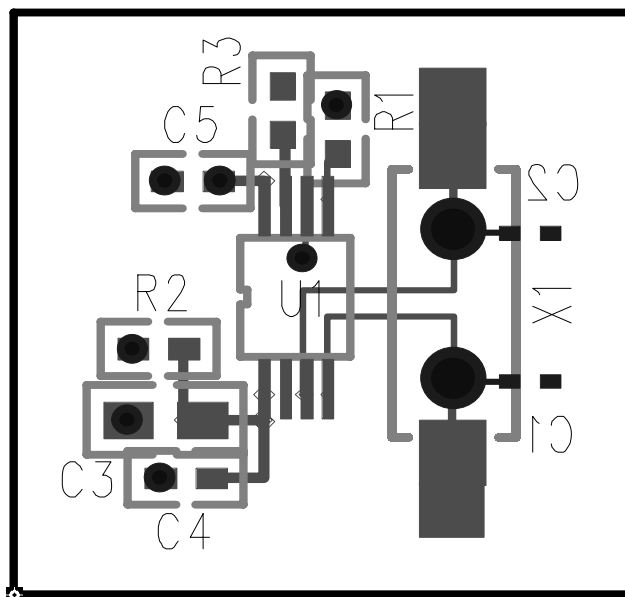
B. ICS840001I PC BOARD LAYOUT EXAMPLE
